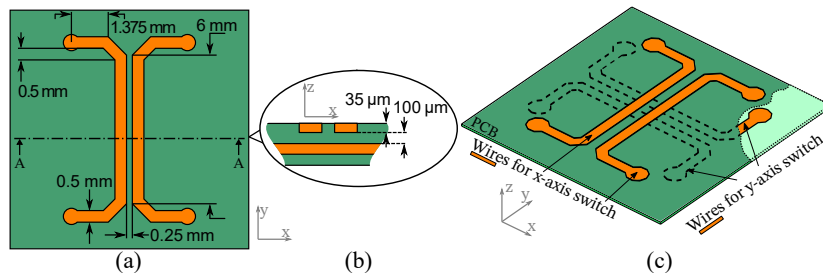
PCB geometry. (a) Top view. (b) A-A cut front view. (c) Isometric view.
